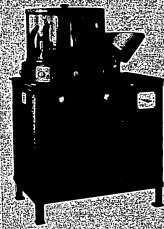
Model 16AK Automatic Needle Roller Diameter Checking Machine
